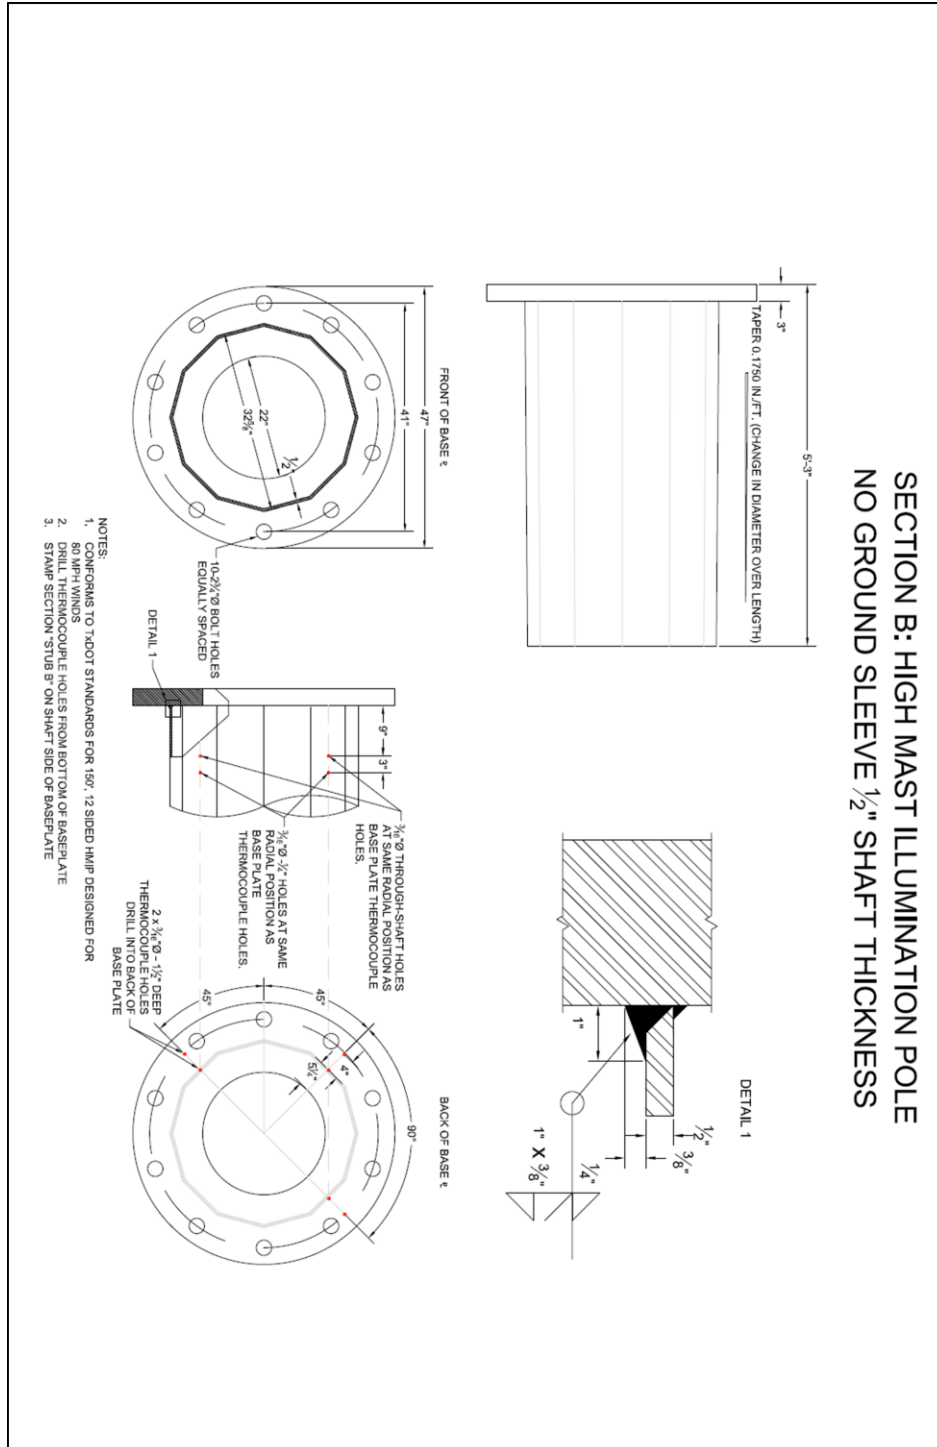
Design drawing for specimen 33-3-12-TX-SG-SC
